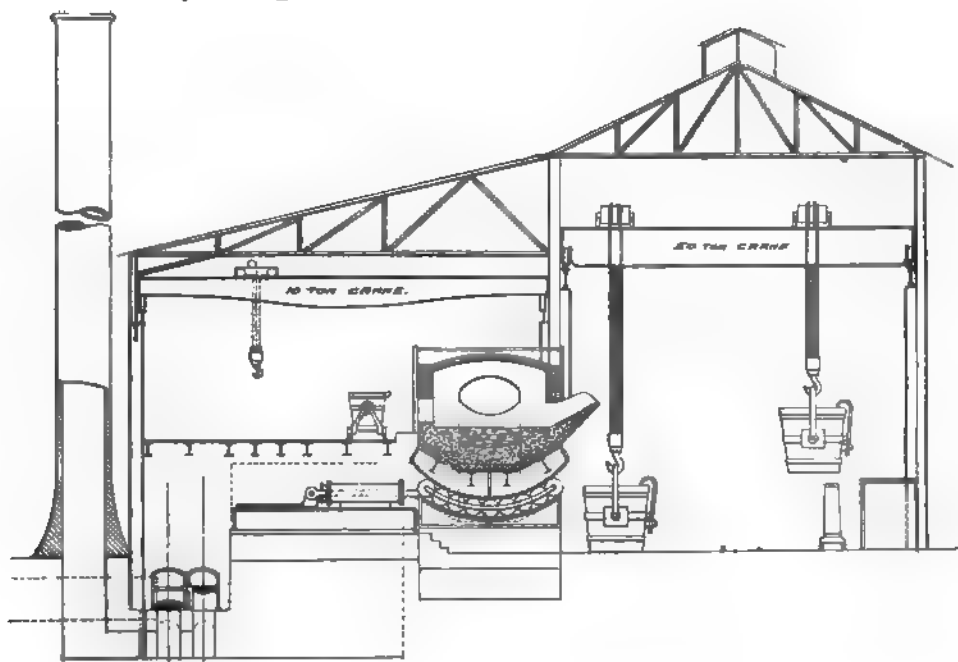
END VIEW OF A TALBOT OPEN-HEARTH PLANT.
